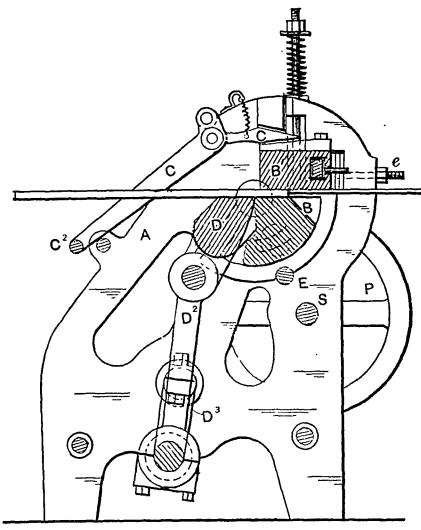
Vertical Section Showing Arrangement of Parts Before Bending.
